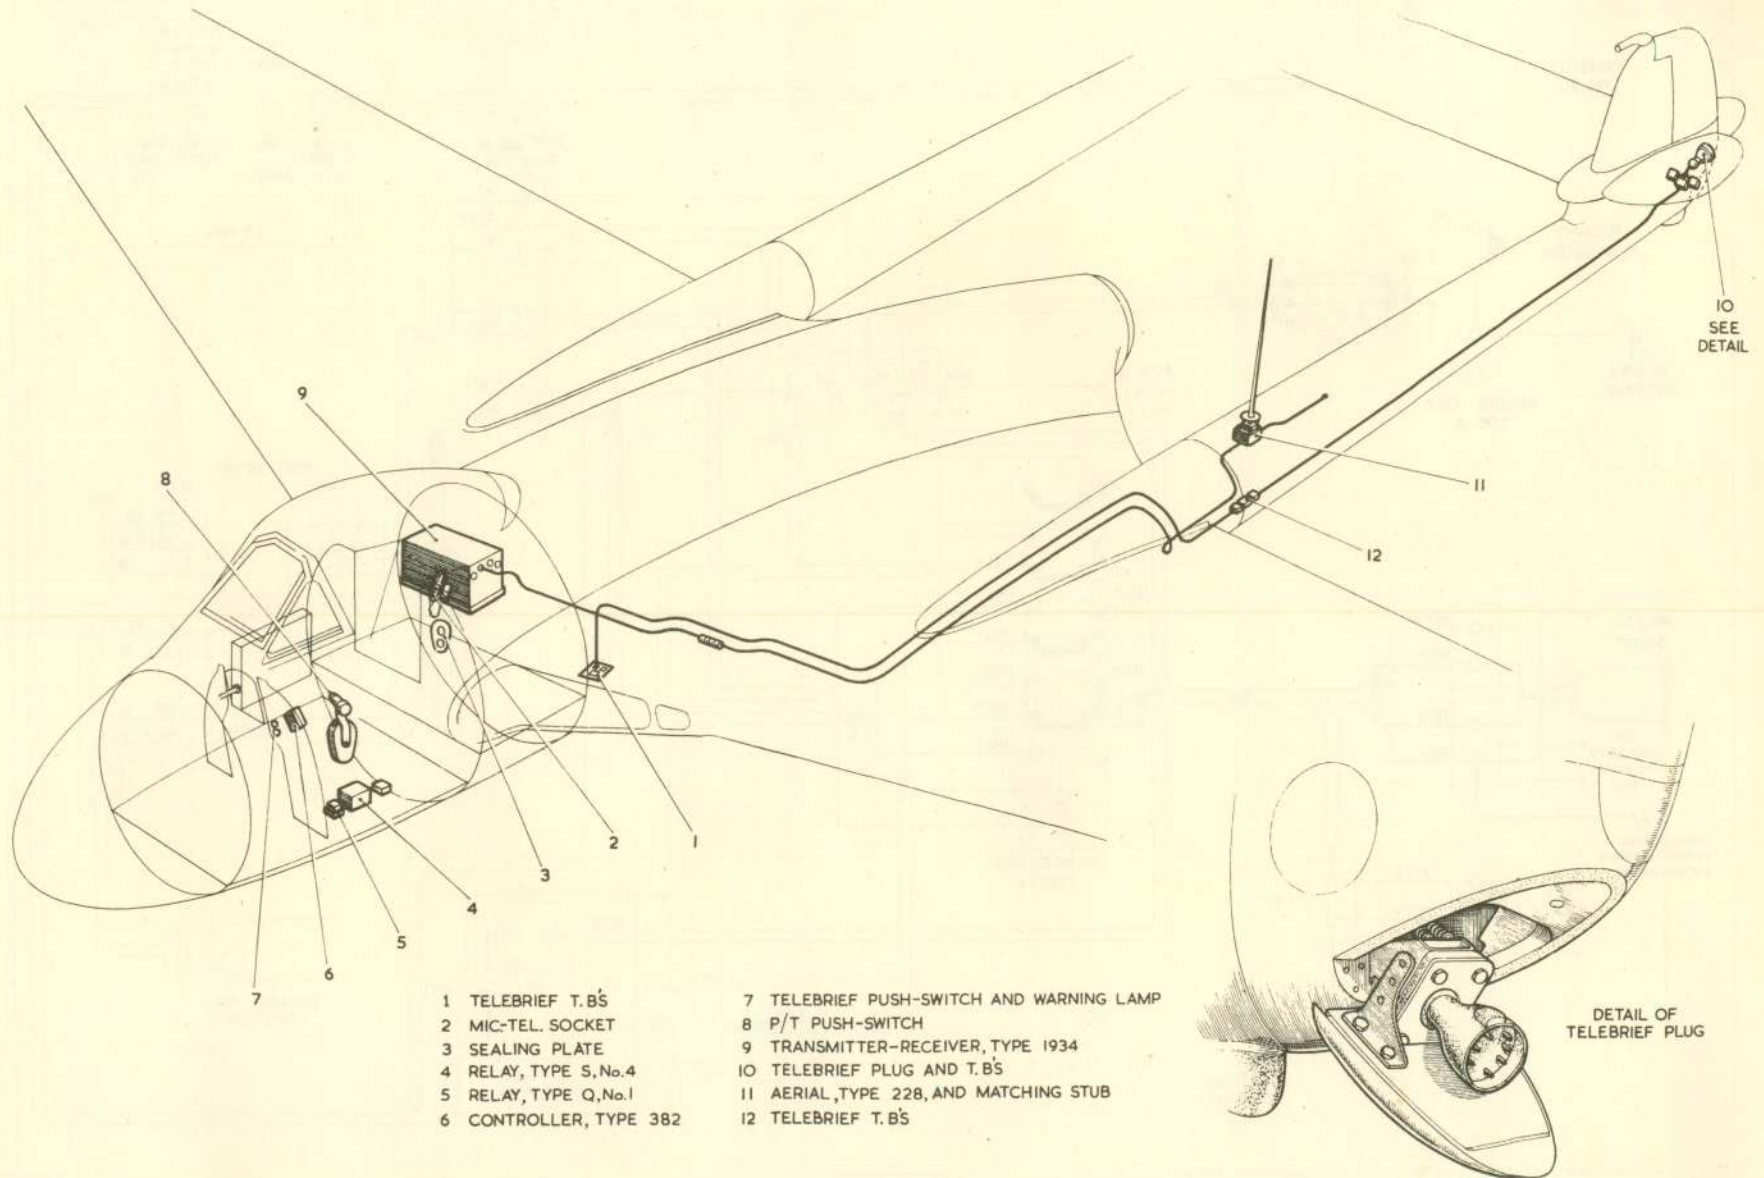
and 18012 - location of equipment
